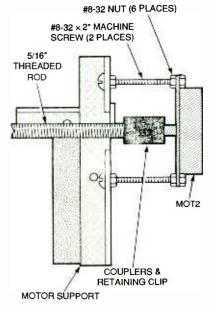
This side view of the drill-caddy support details the holes where the motor mounts and the notch that provides clearance for the threaded rod.
